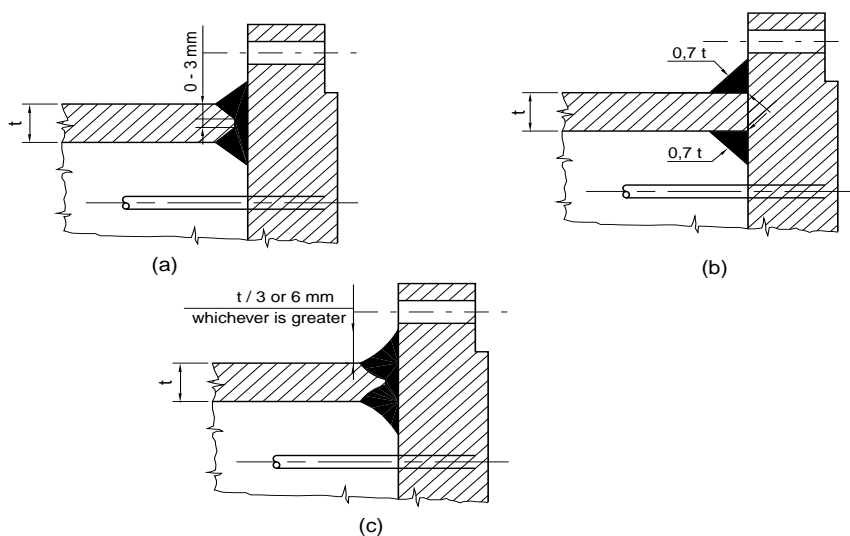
Types of joints for tubesheets to shells (butt welded)
